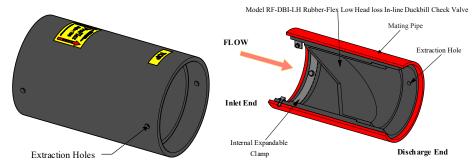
Model RF-DBI-LH Rubber-Flex Low Head Loss Flanged In-Line Duckbill Check Valve
